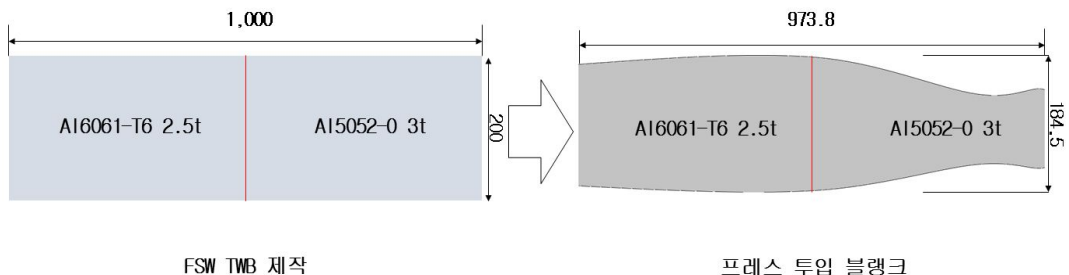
Examples of joining and forming of different materials using TWB method
